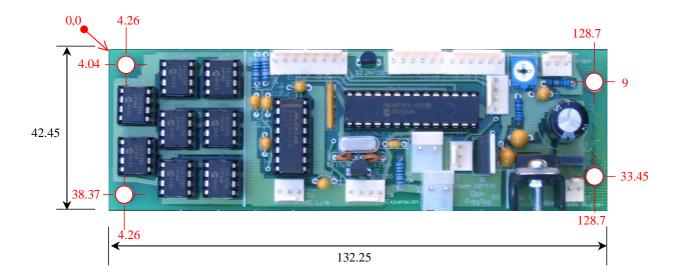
FragTag Odin v1.0 dimensions and mounting holes highlighted in red (all dimensions in mm).
